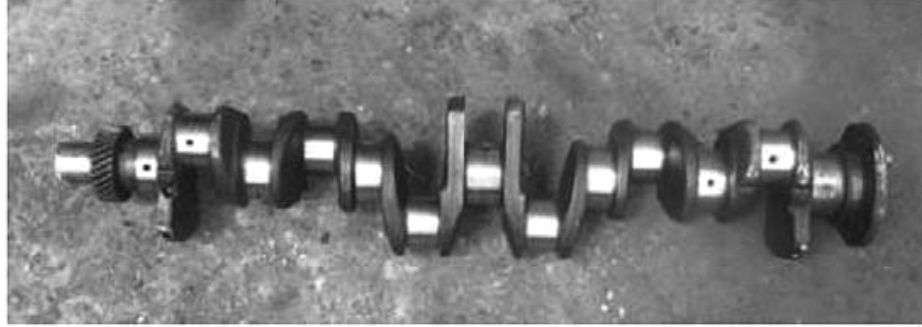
Failed crankshaft from a 6-cylinder diesel engine from the study by Asi [2006].
